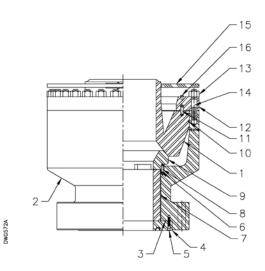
18-3/4 in. –5,000, 10,000, 15,000 3.0 ksi Subsea Flexible Joint Parts List
